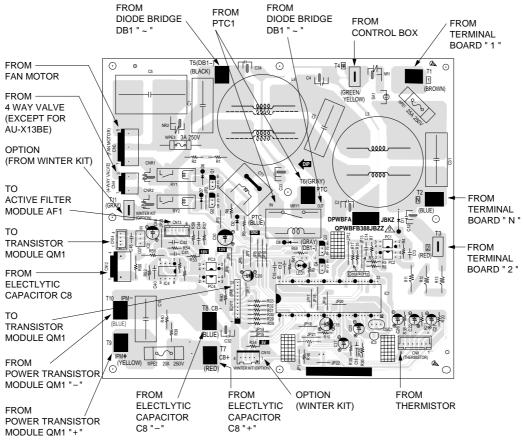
Printed Wiring Board for AU-X13BE and AE-X13BE
